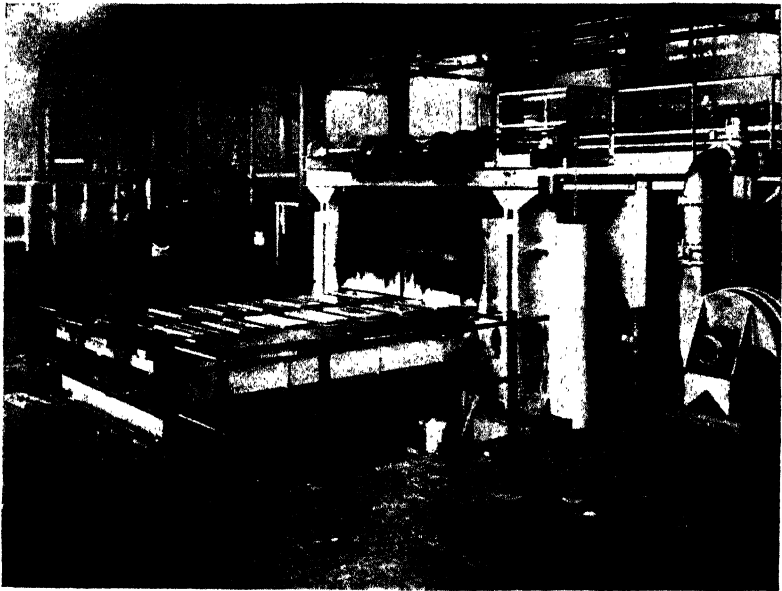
XII. —Charging end of a continuous-pair furnace. (*Courtesy of The Youngstown Sheet & Tube Co.*)
